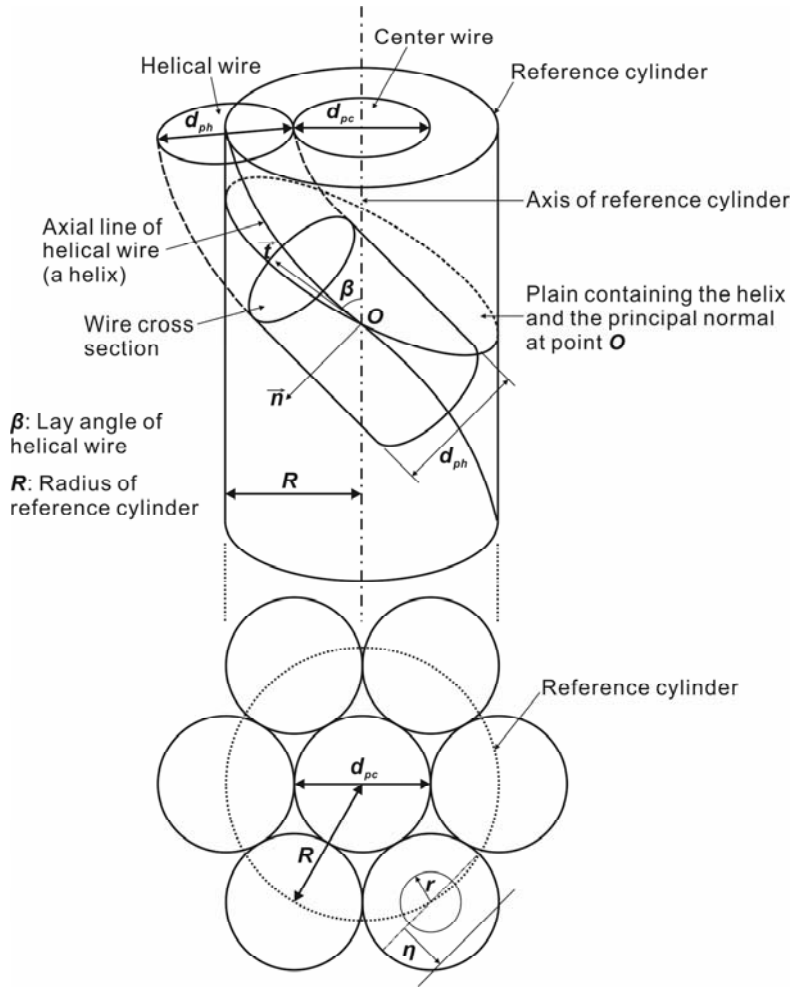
Geometry of a helical wire wrapped around a center wire (Machida and Durelli, 1973)
